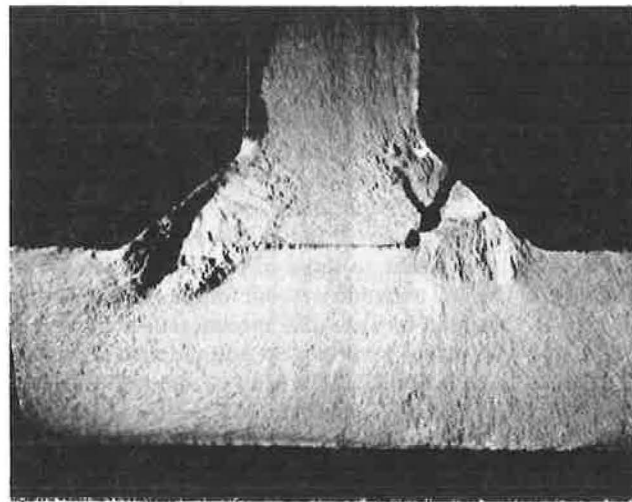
A gas pocket in the longitudinal fillet weld of a welded beam.
